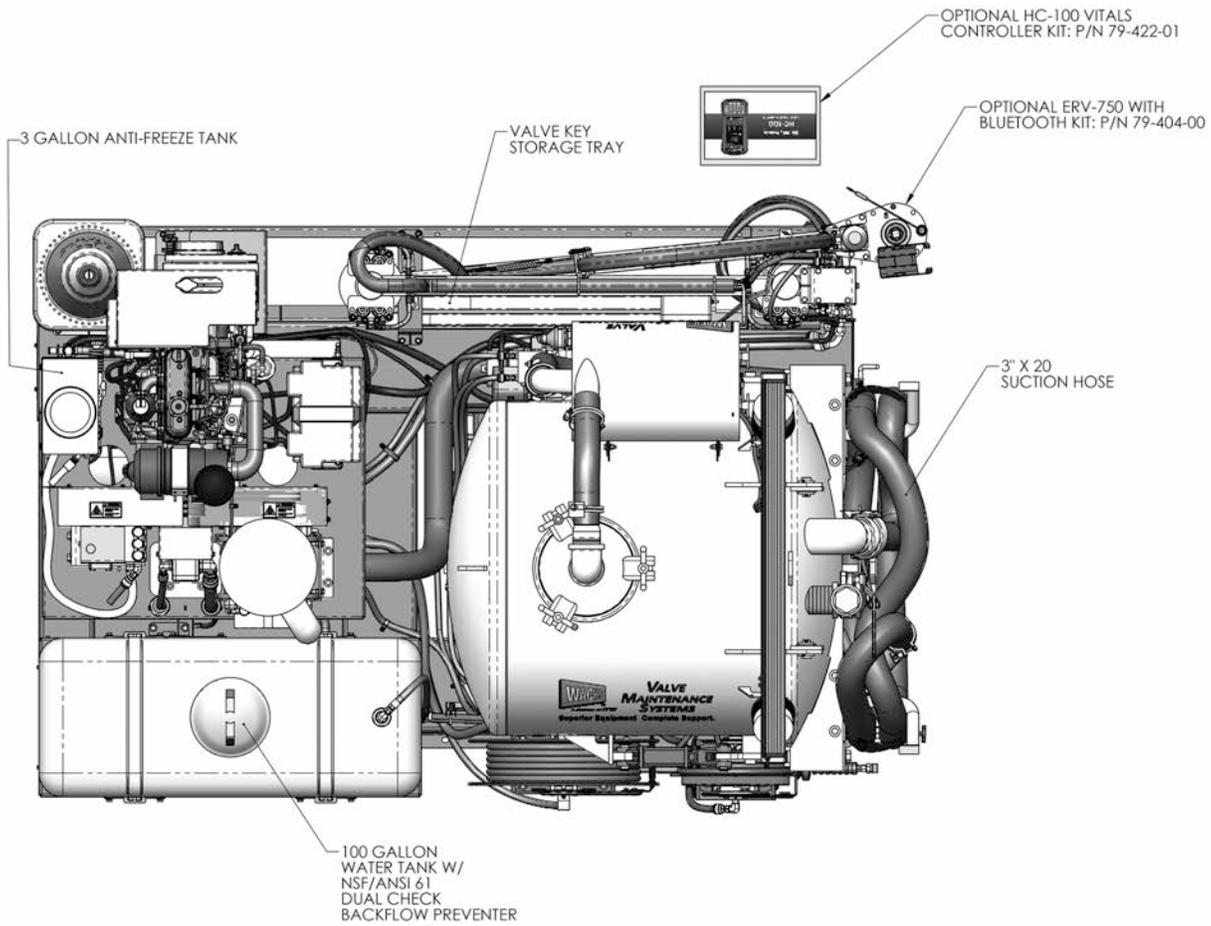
The drawing shows the top view of the Standard Builder diesel engine configuration, 77-000-60.
